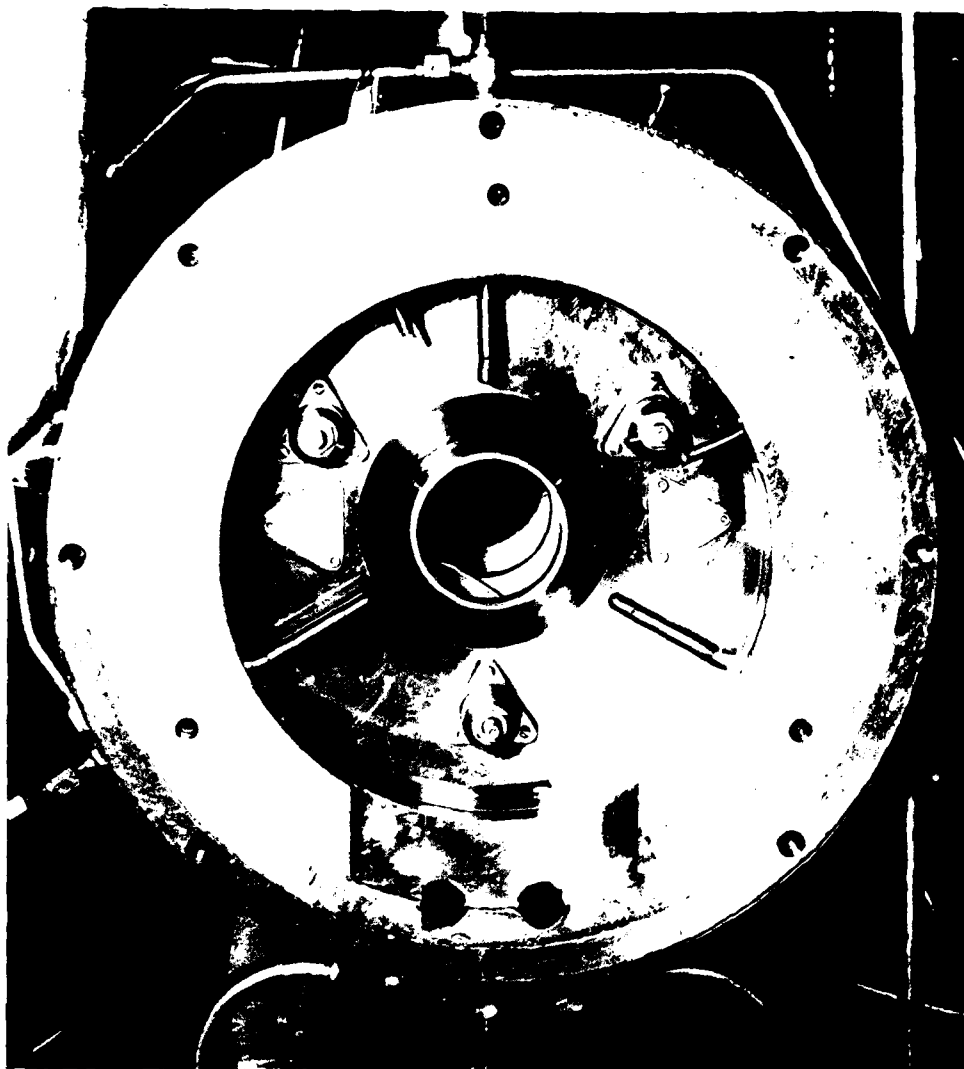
Partially Disassembled Test Housing (Showing Probes and Oil Jets)
